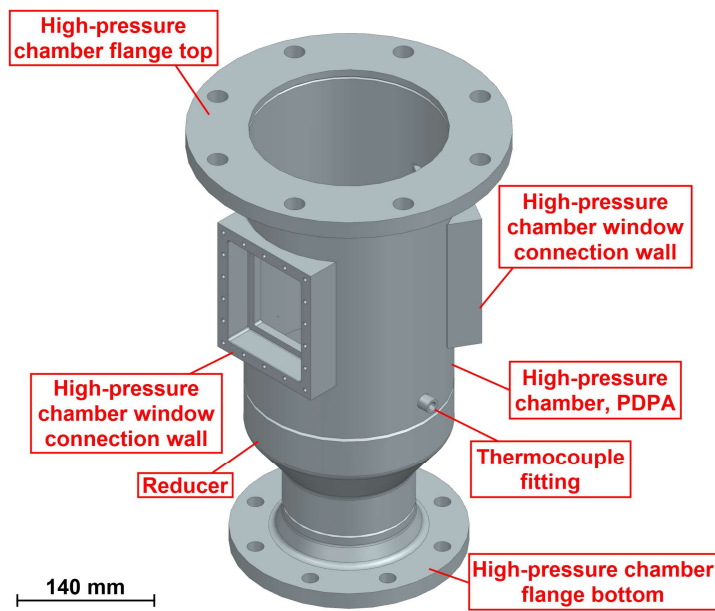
High-pressure chamber assembly, PDPA (isometric view).
